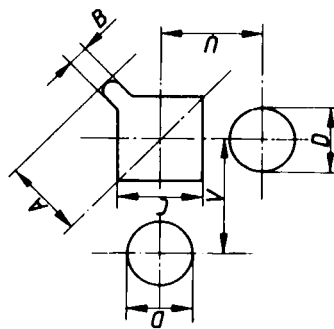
Spindle and drive holes in flange No. 1 (see 4.2.3)
